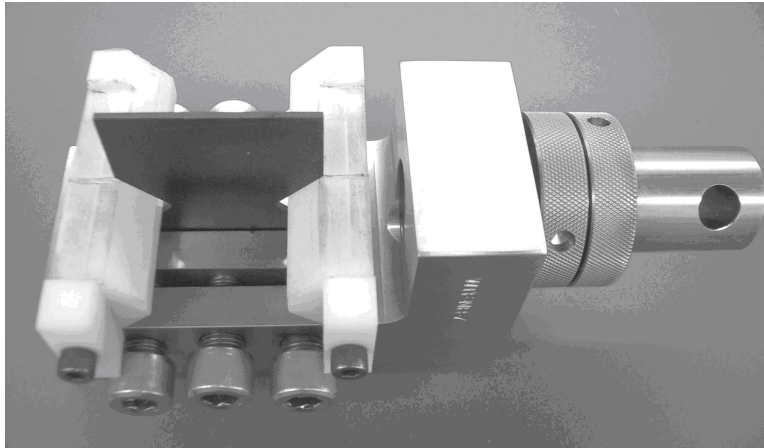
Half the rail shear test fixture removed, test specimen sticking out.
